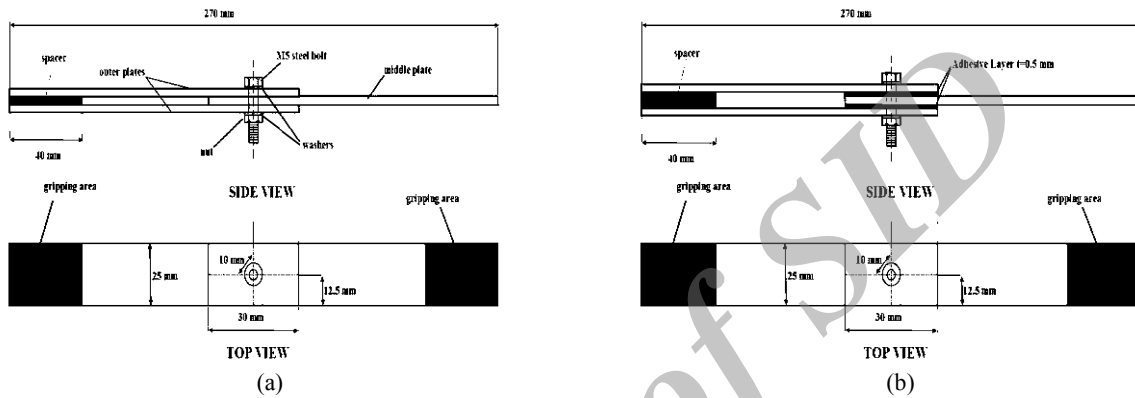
Configurations and dimensions of the joints. (a) Simple bolted joint, (b) Hybrid (bonded- bolted) joint.
